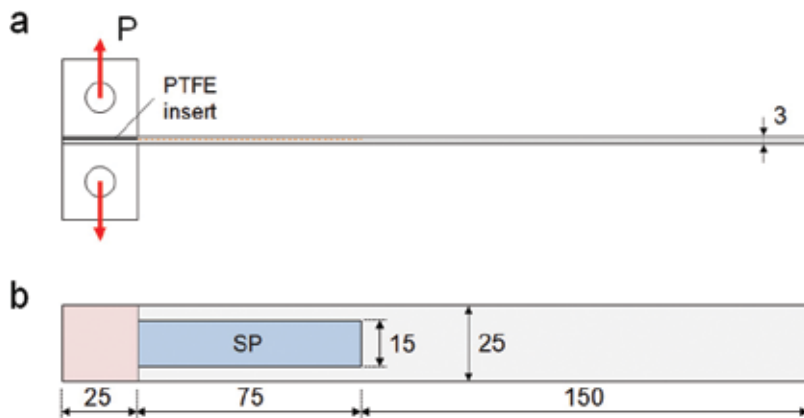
Schematic depiction of the modified DCB test specimen configuration. (a) Side view. (b) Top view. Dimensions in mm.
